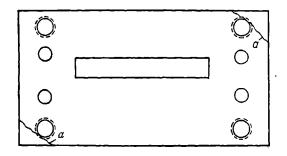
Hardening cracks through auxiliar orifices of a $die-a_0$ cracks
